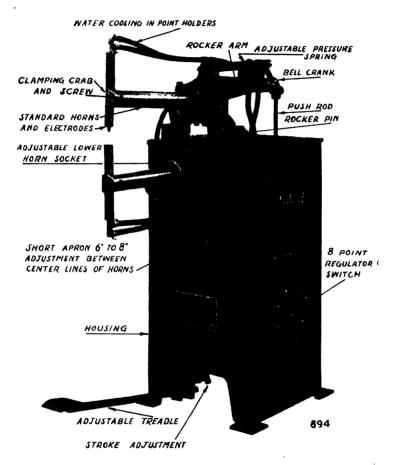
A small spot welder (Courtesy of: The Federal Machine and Welder Company)
